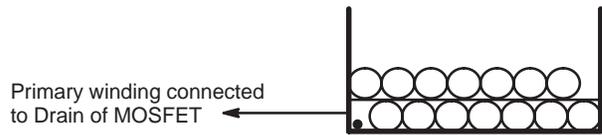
Wind the Primary Winding in the Innermost Layer of Transformer
